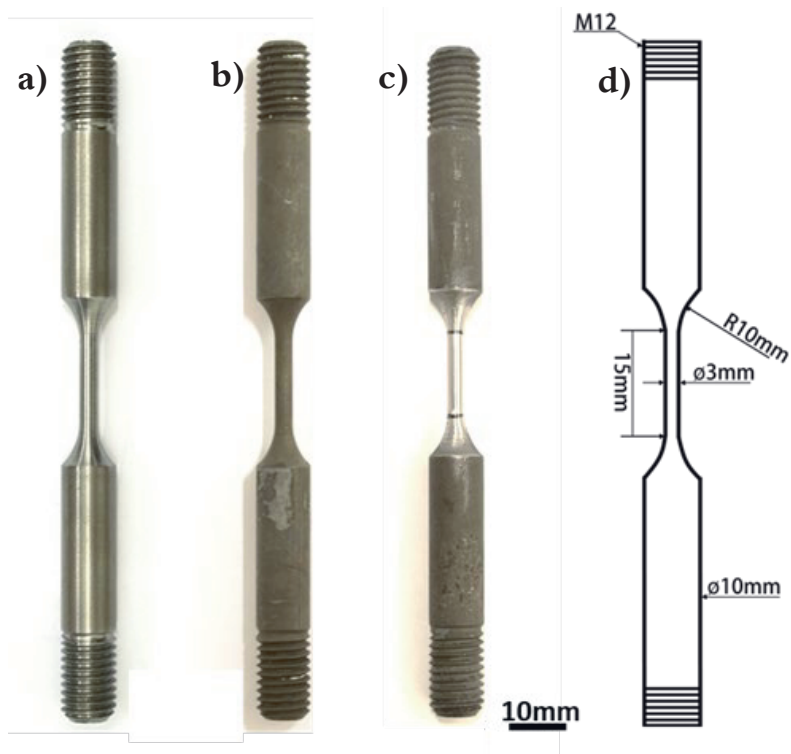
Shape and layout of tensile test samples a) As-machined b) After heat treatment c) After grinding d) Layout of specimens.
